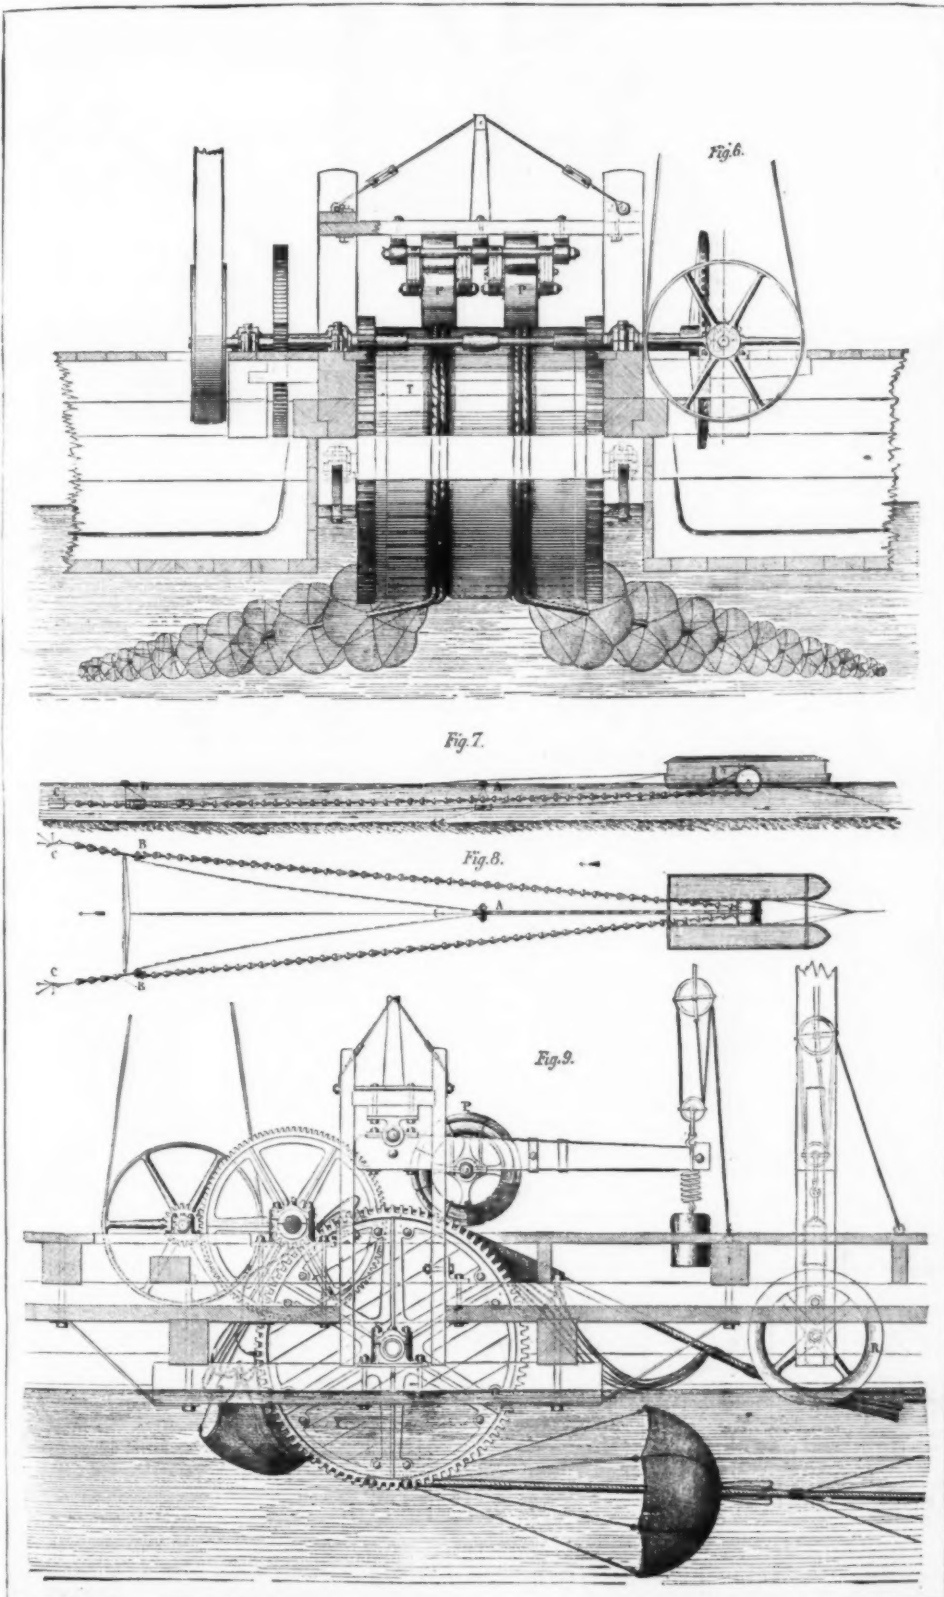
Front View of Mechanism. FIG. 7.—Side View of the Apparatus. FIG. 8.—Plan. FIG. 9.—Side View of Mechanism.
